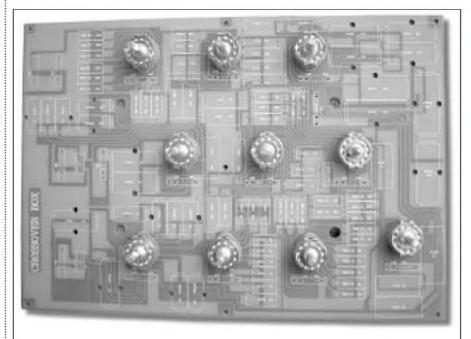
VCB-100 printed circuit board with rotary switches installed (courtesy of Vidsonix Corp.).
